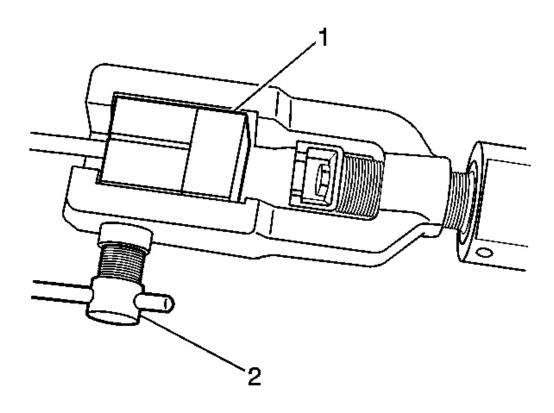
View Of Clamping Screw & Unused Die Courtesy of GENERAL MOTORS CORP.
